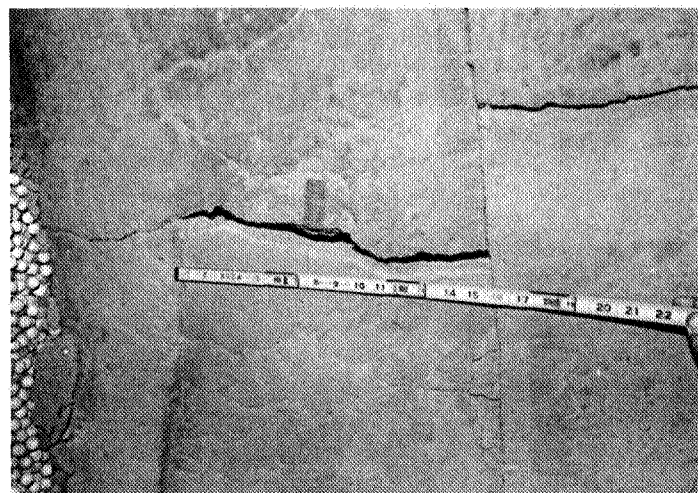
Secondary reformer — crack in refractory at location of shell failure.
